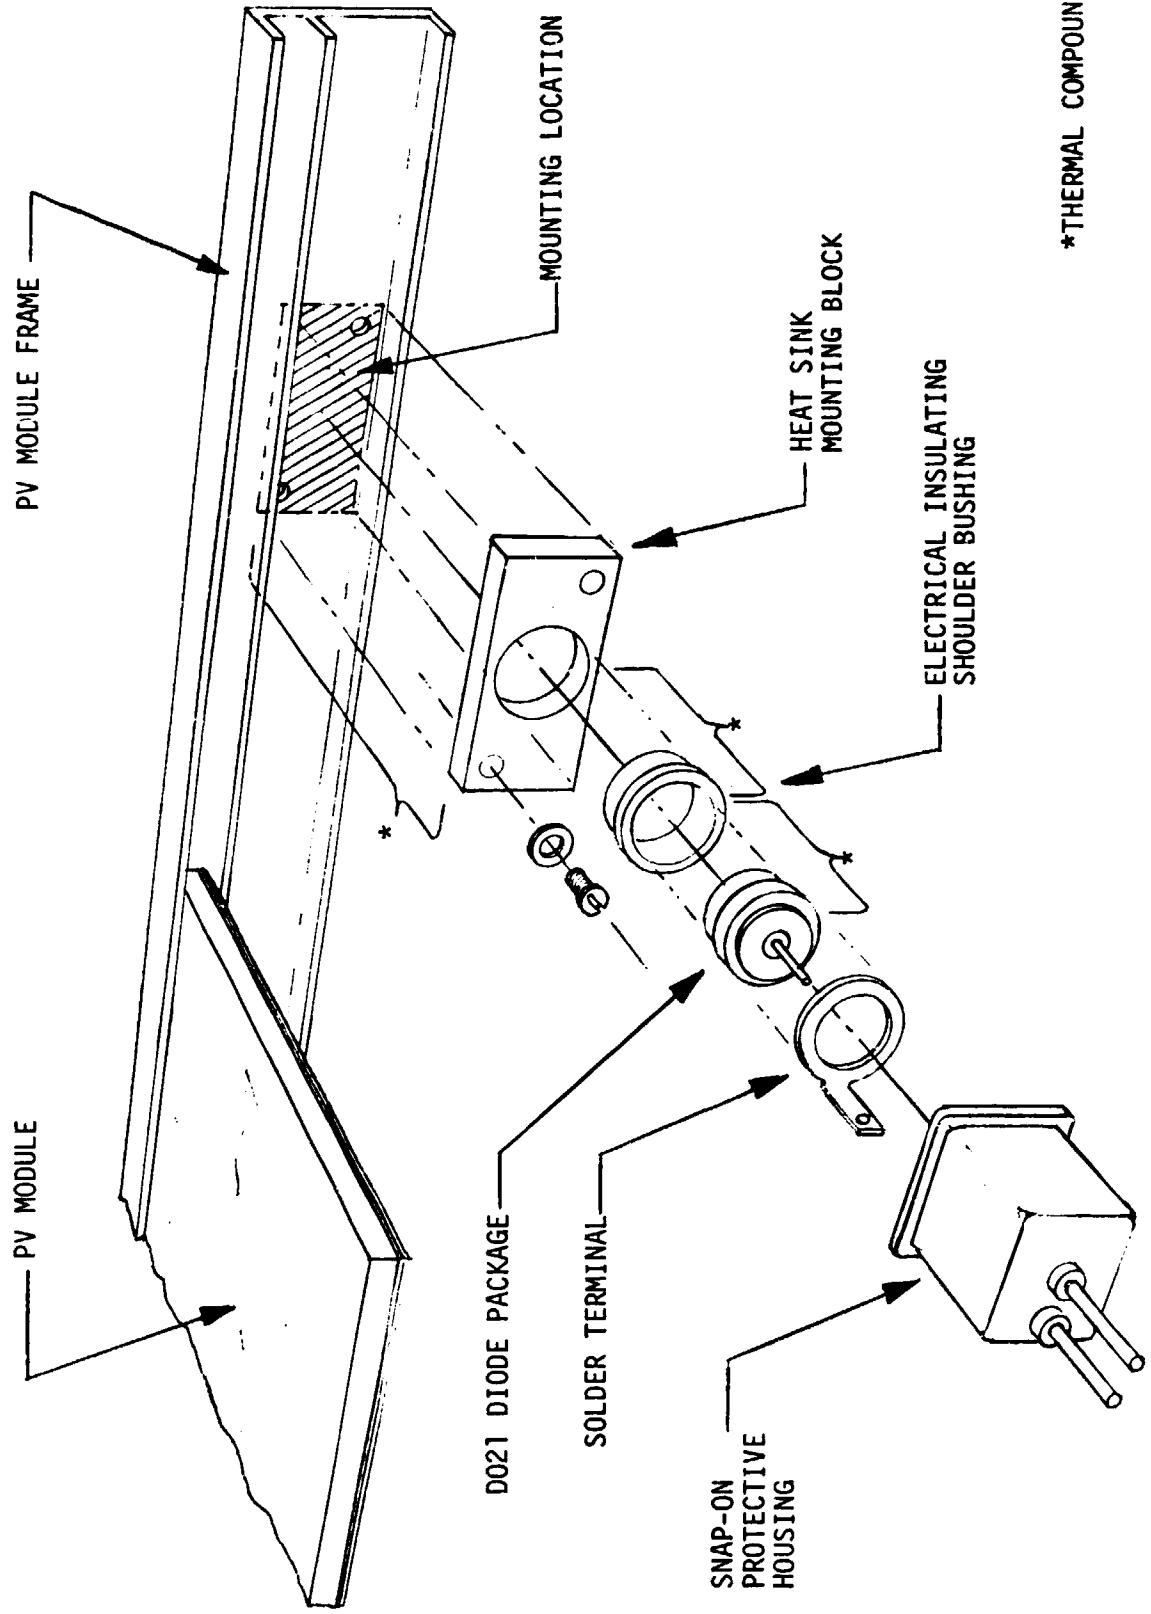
D021 Diode Package Mounted to PV Module Frame
